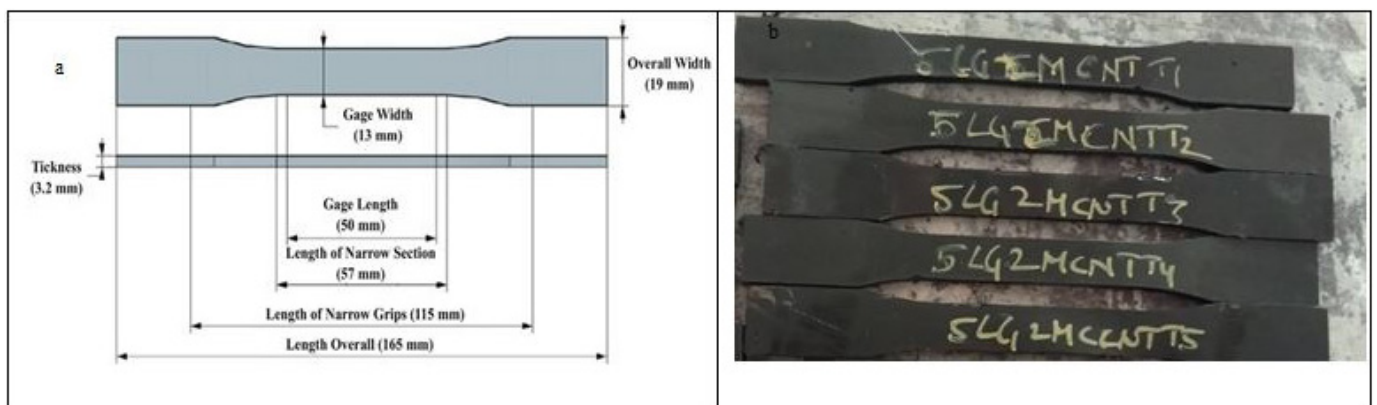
Dimension for uniaxial loading condition following the standard ASTM D638
